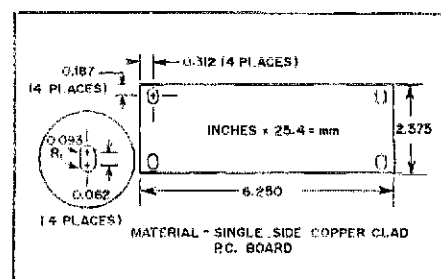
Pickup box top cover. The slotted holes line up with the nuts soldered to the side plates to facilitate securing the top with 6-32 machine screws.
